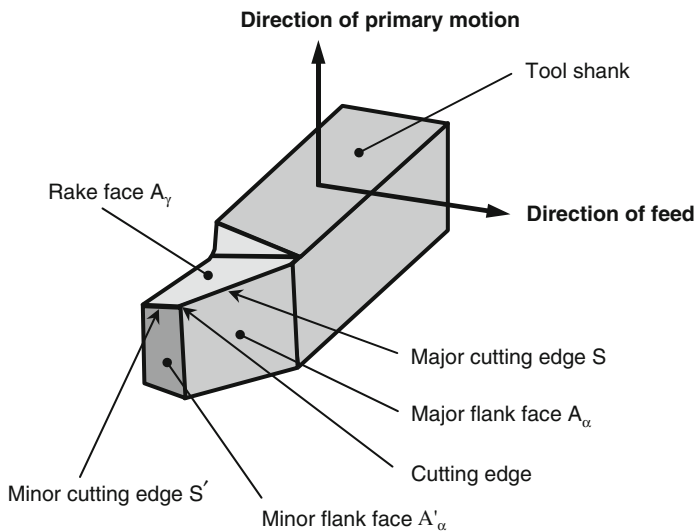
Cutting edges and faces of the wedge, acc. to DIN 6581
